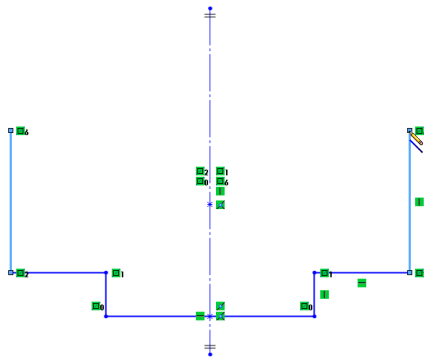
Sketch drawn using the *Dynamic Mirror Entities* tool
